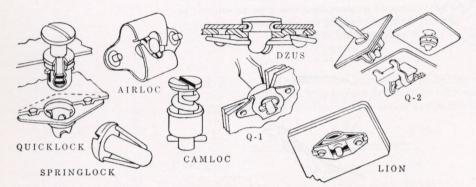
QUICK-RELEASE FASTENERS: This is a group of typical quick-release fasteners for use in attaching inspection doors and similar applications. Turning one element with a screw-driver produces a cam-like engagement with another element in most of these systems. Turning in opposite direction subsequently disengages the members quickly with only a partial turn of the screw-driver. This contrasts with regular screw fasteners which must be rotated many complete turns to engage or disengage the members.
